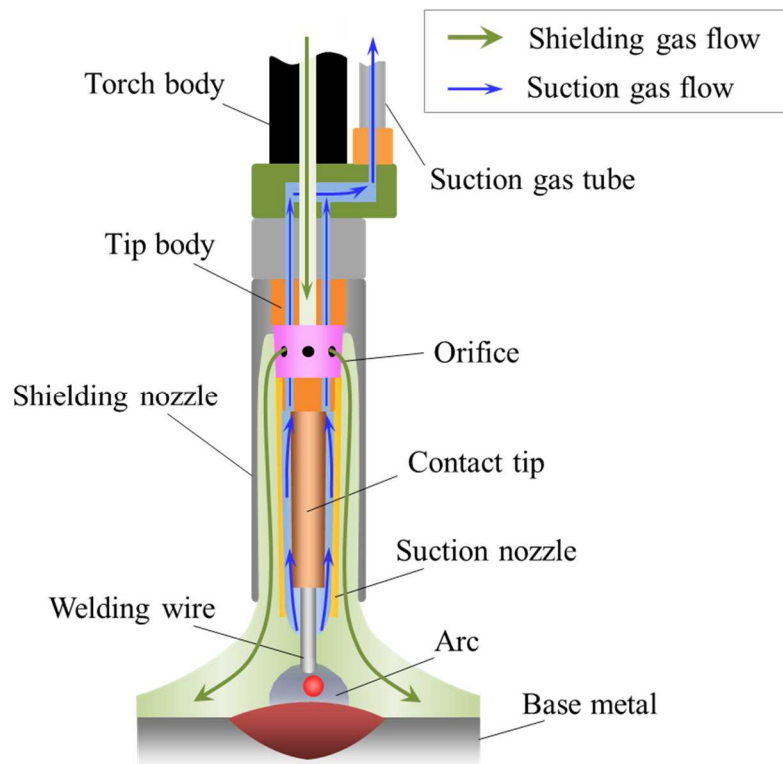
Schematic illustration of the developed welding torch
